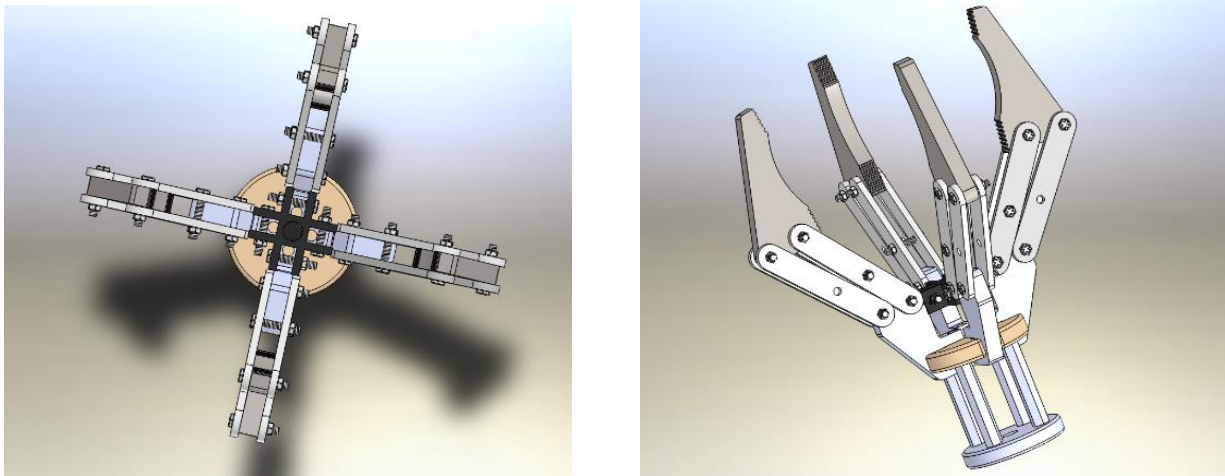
Assembly model of the complete pneumatic four jaw gripper
